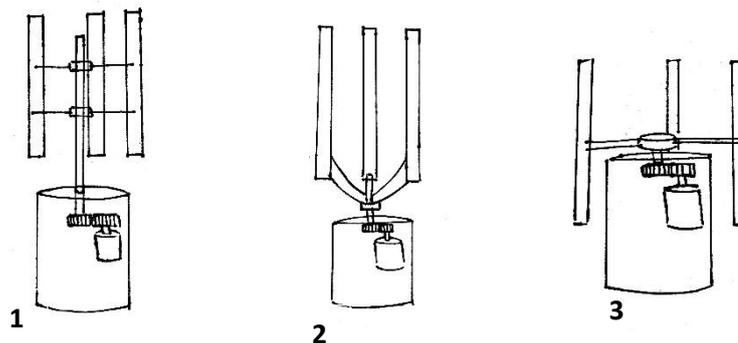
From left to right, rotor assembly configuration alternatives 1, 2 & 3
